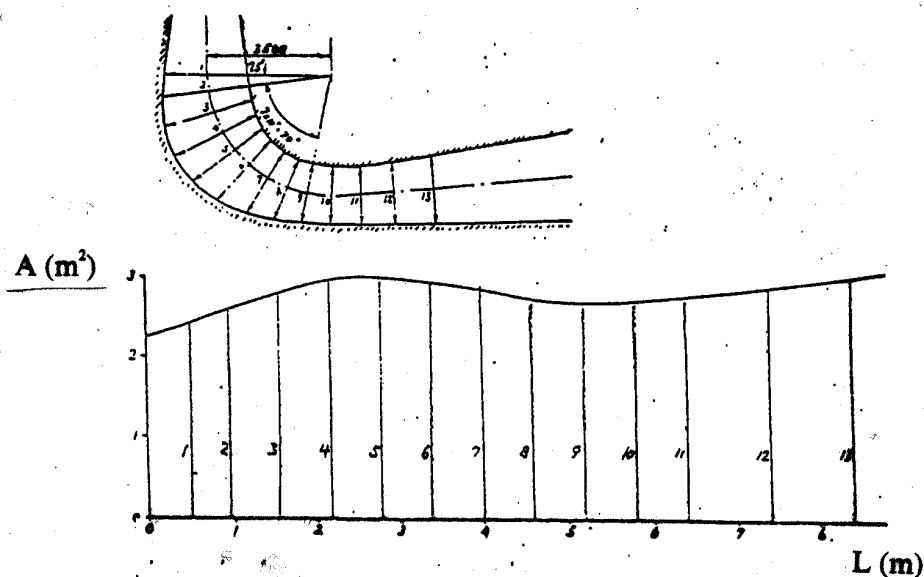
Shape of draft tube bend of a Francis turbine P=36.7 MW, H=236 m, n= 428.7 RPM
